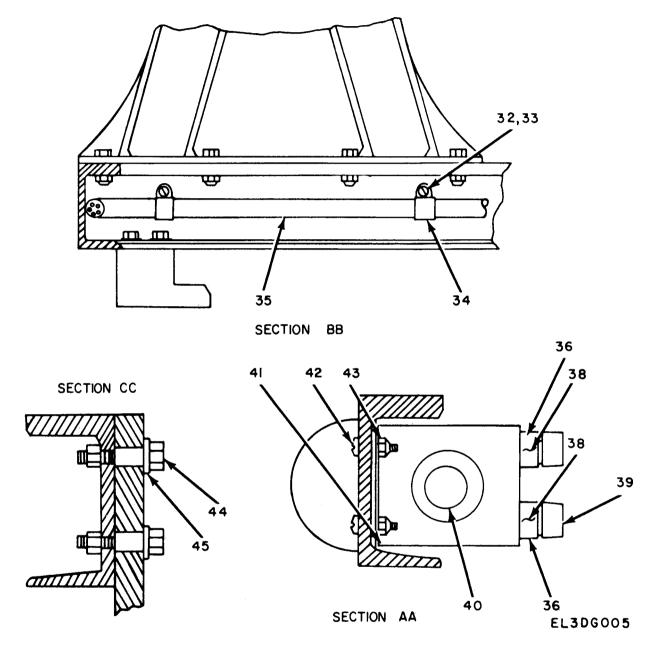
Reeling Machines, Cable, Motor Driven RL-172/G and RL-172A/G (Sheet 3 of 3).
